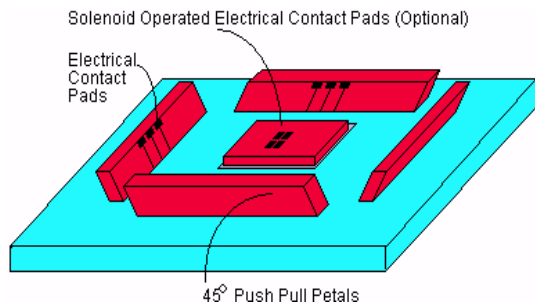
Contact pads are mounted on the plates and a solenoid operated pad
